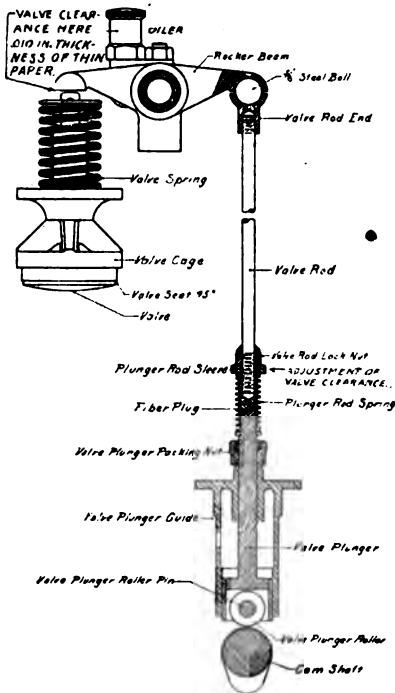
Valve-clearance on valves-in-the-head is measured between end of rocker-arm and top end of valve, as above. Adjustment is made on lower part of valve rod on the Dorris, as above. On the Marmon, adjustment is at the top of rod as per J. fig. 1, page 90. On the Buick, at the top, per page 109.
